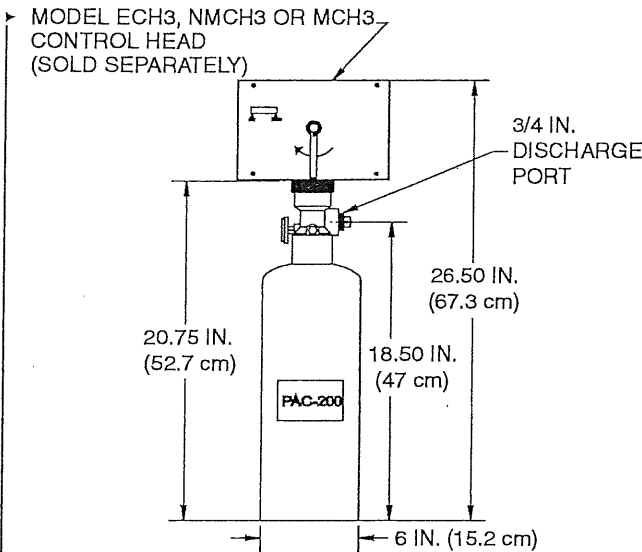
Model PAC-200 Pneumatic Actuating Cylinder.
